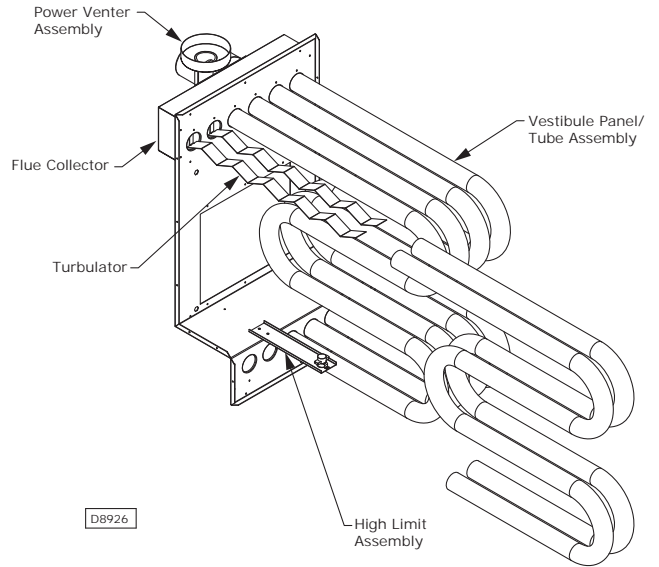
Power venter assembly (100/250 unit sizes shown)
